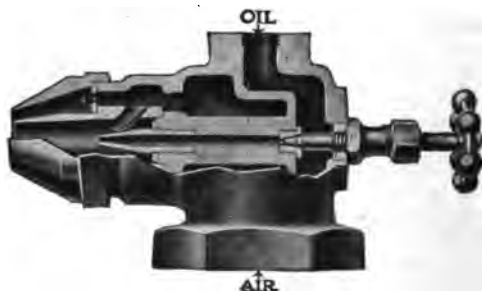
SEC. 10rr.—Sectional view of Turbo sprayer.
